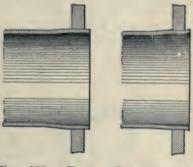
TAPER-PIN TUBE EXPANDER.
